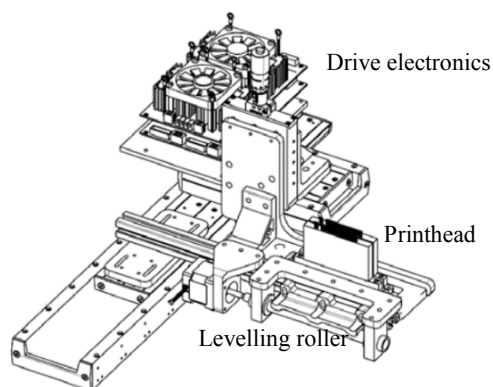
Axis system constituted of two linear motors supporting the printhead, its drive electronics and the powder levelling system.
